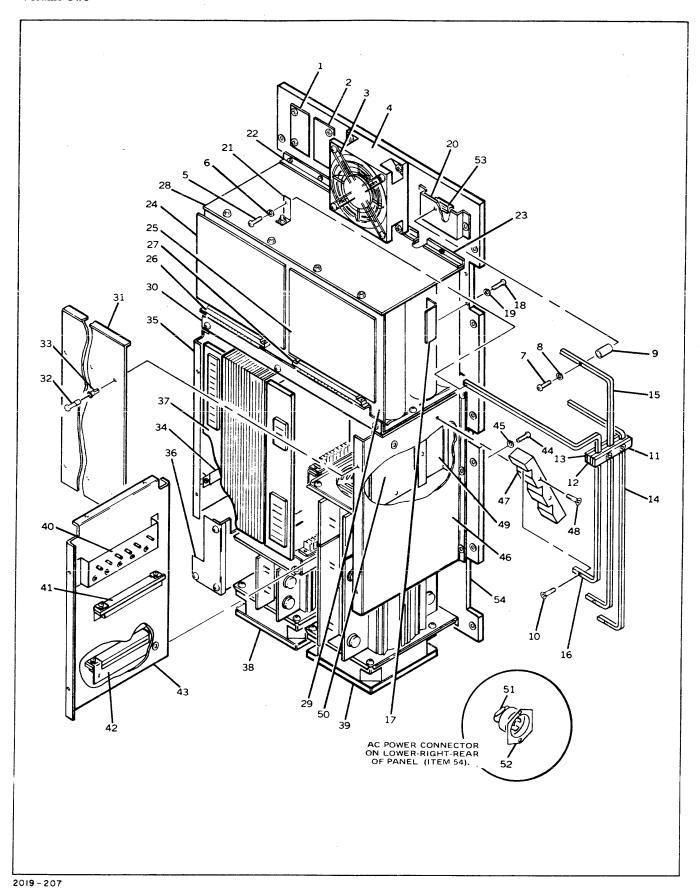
A300 Power Supply Assembly (02116-6124), Exploded View
